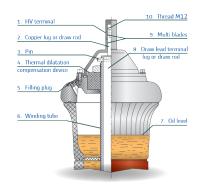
H1 head type (Draw lead or draw rod up to 170 kV)
